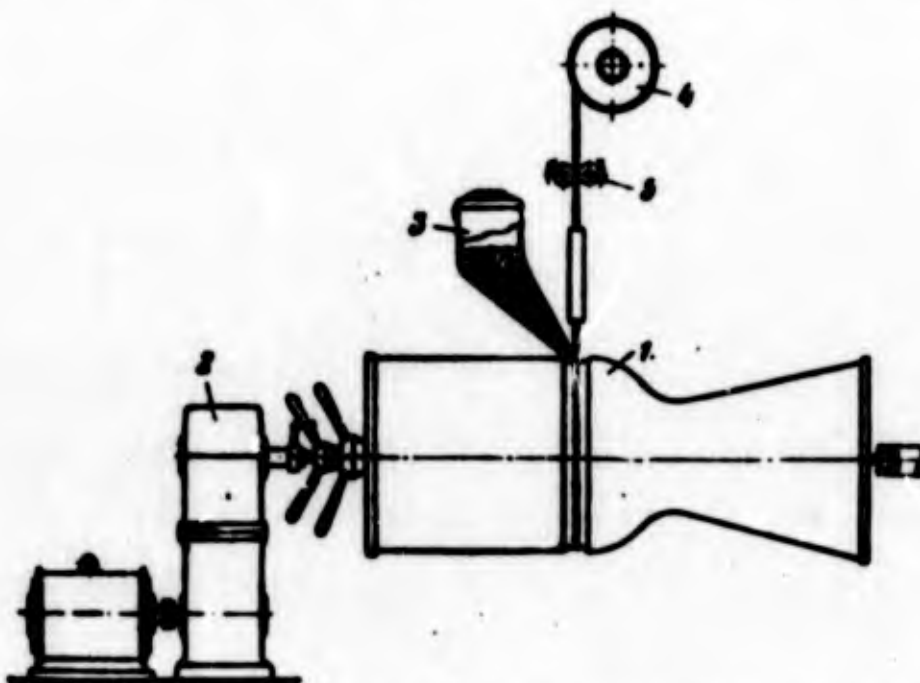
Diagram of automatic welding of circular seams. 1) welded assembly; 2) reducing gears; 3) flux hopper; 4) electrode wire holder; 5) feed rollers.
